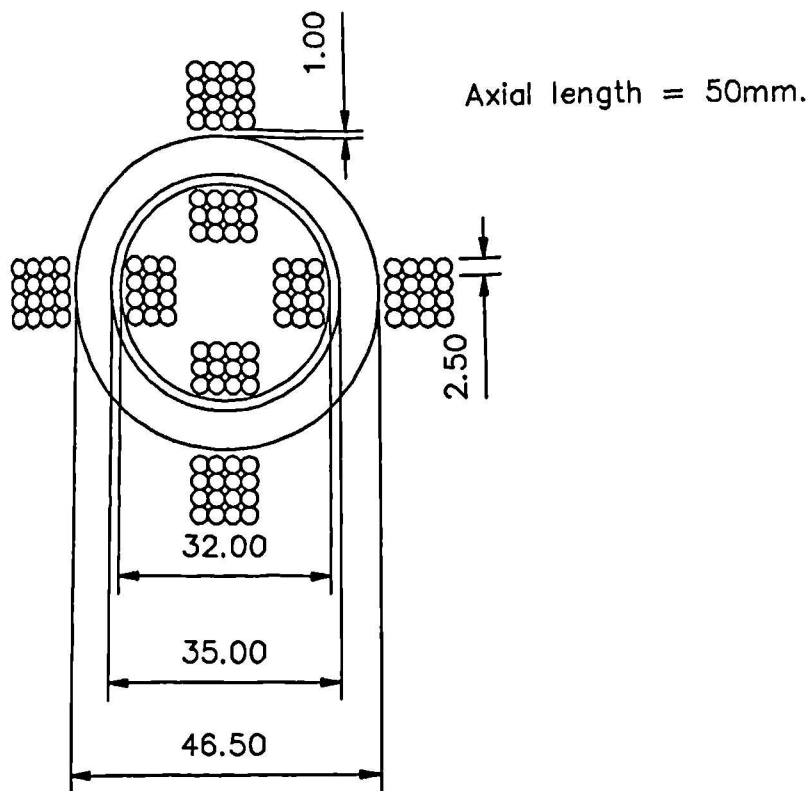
Dimensions of fixture design No. 7 for the magnetization of the assembled rotor.
